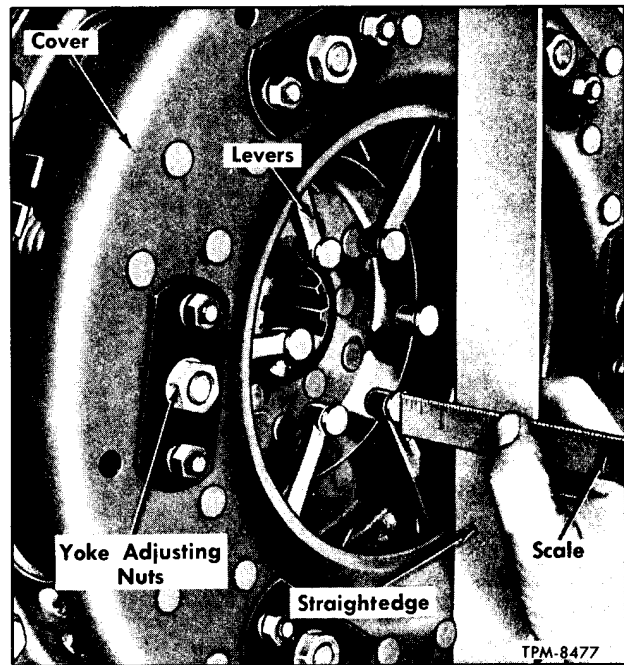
Checking Release Lever Button Position With Scale and Straight Edge
